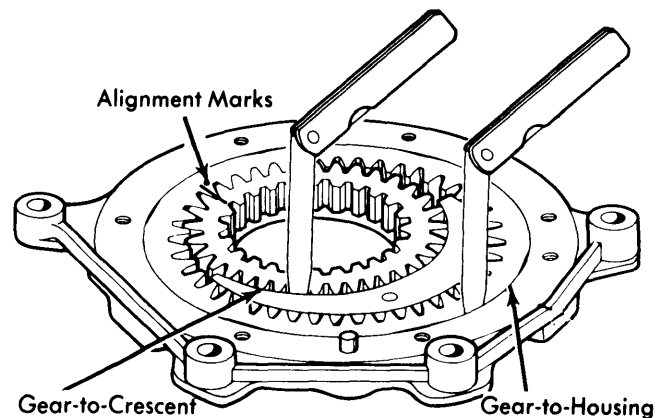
Correct Procedure to Measure Oil Pump Clearances
